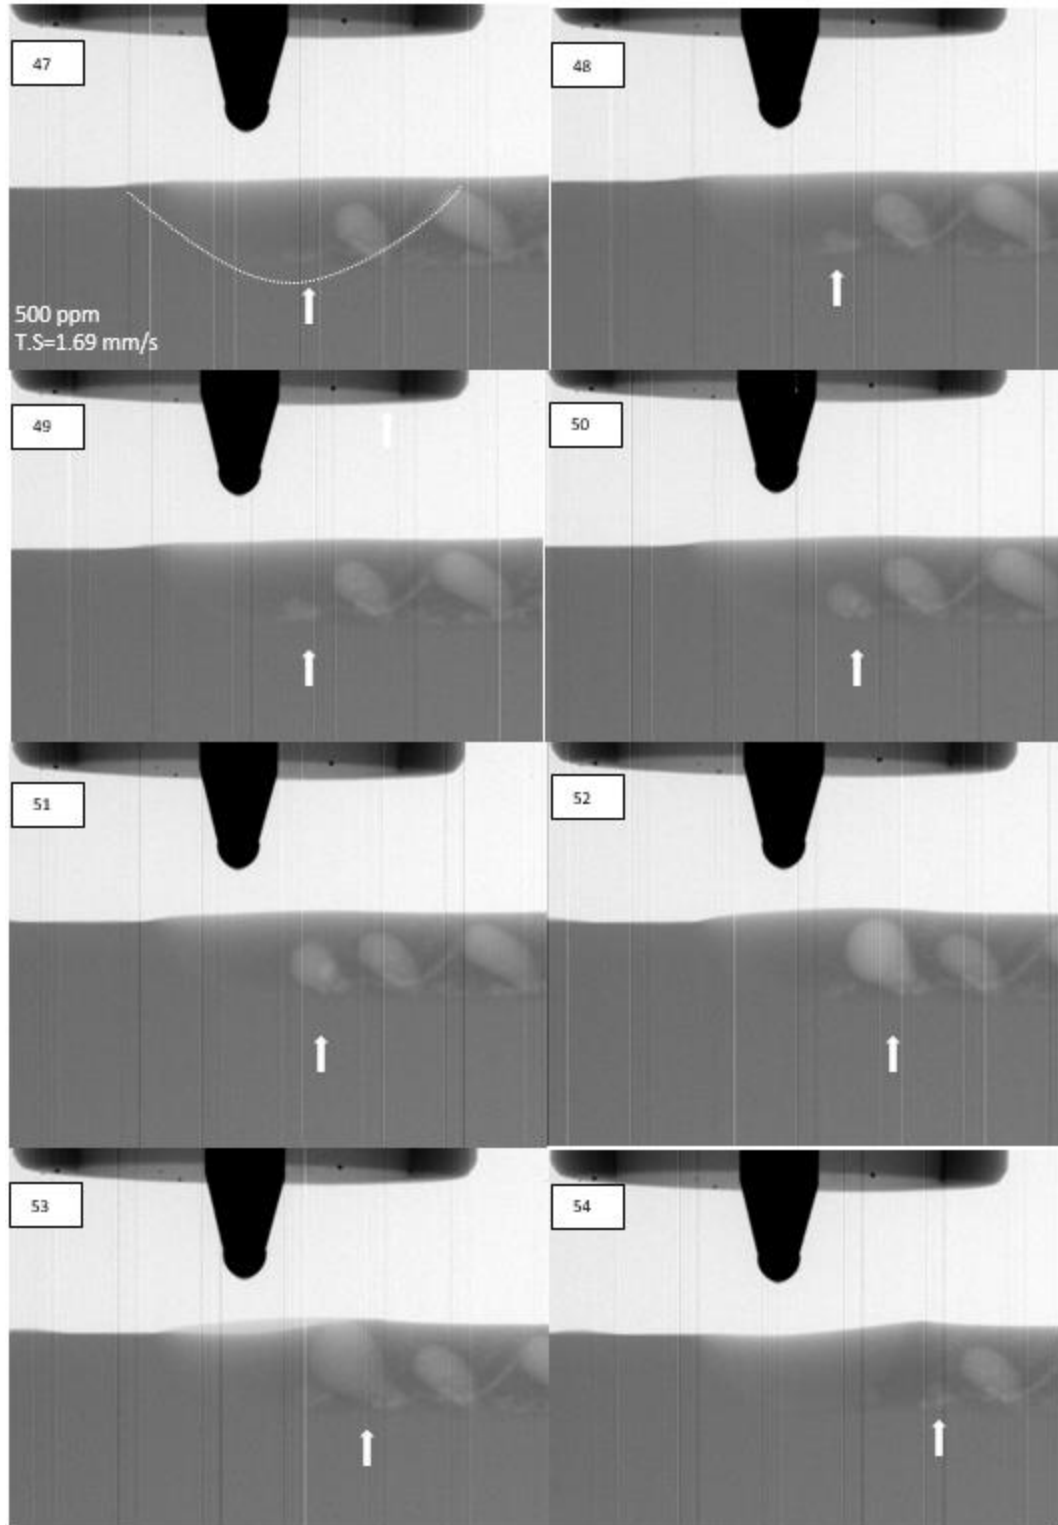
Alloy 1100 welded using 500 ppm of shielding gas hydrogen at 1.69 mm/s.
